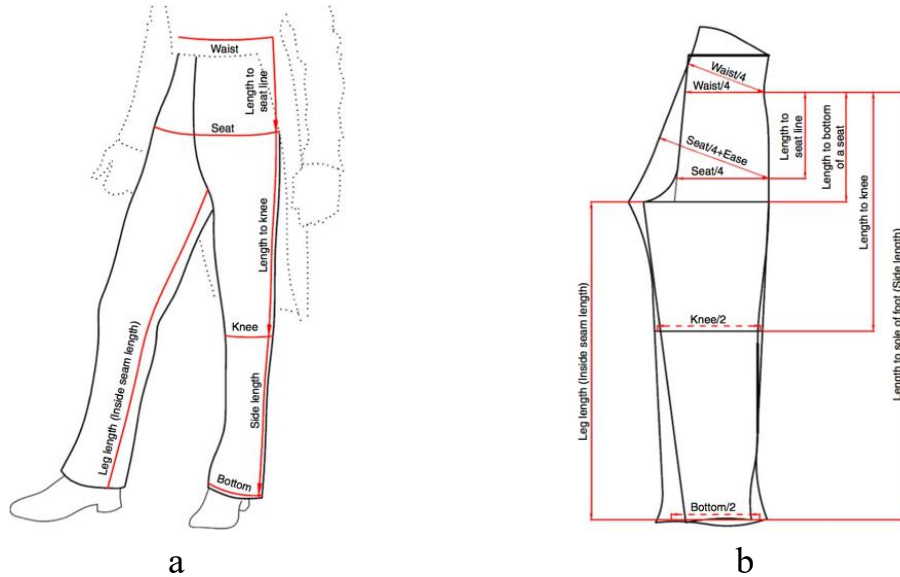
Body dimensions for drafting trousers pattern: a – body measurements; b – for drafting trousers pattern [3]
